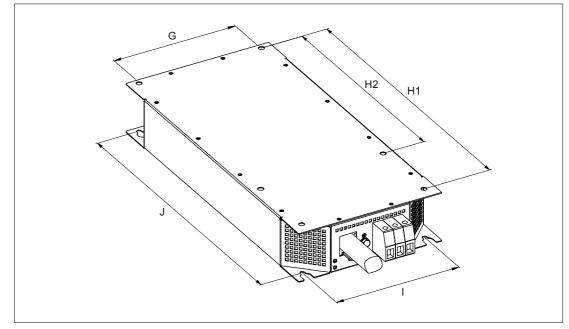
Mounting dimensions of line reactor, frame sizes FSD and FSE
